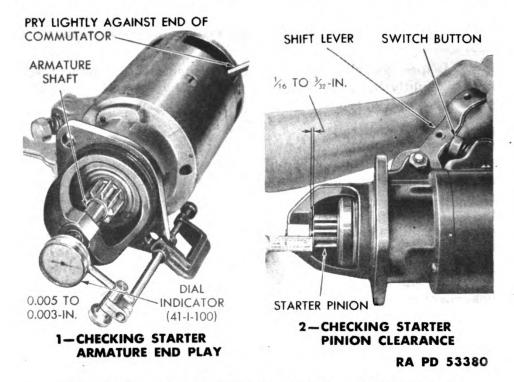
Checking Starter Armature End Play and Pinion Clearance
